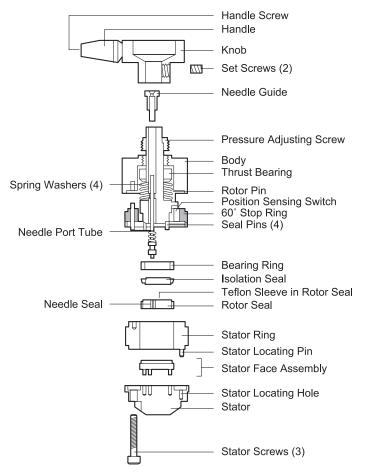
Rheodyne 7725i Injector: Exploded View
